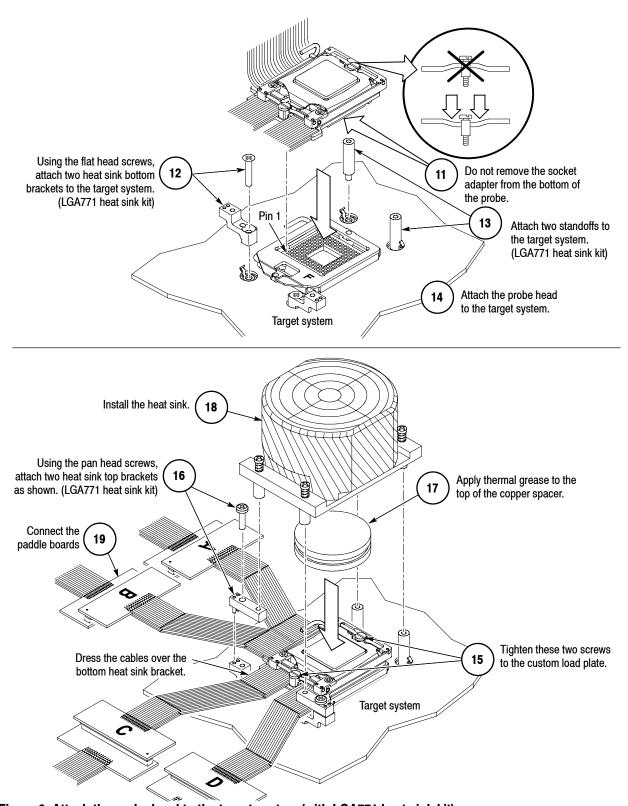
Attach the probe head to the target system (with LGA771 heat sink kit)
